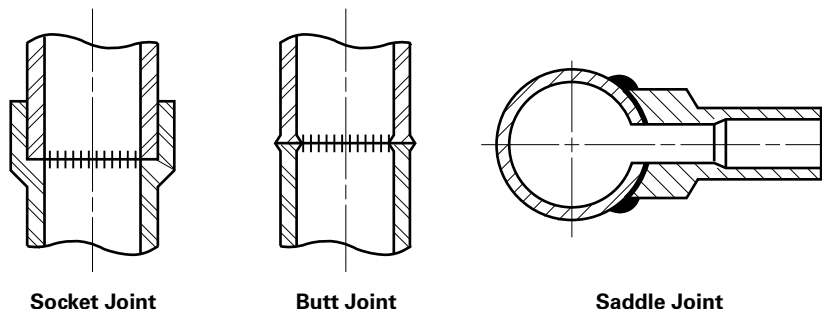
Thermoplastic Heat Fusion Joints
